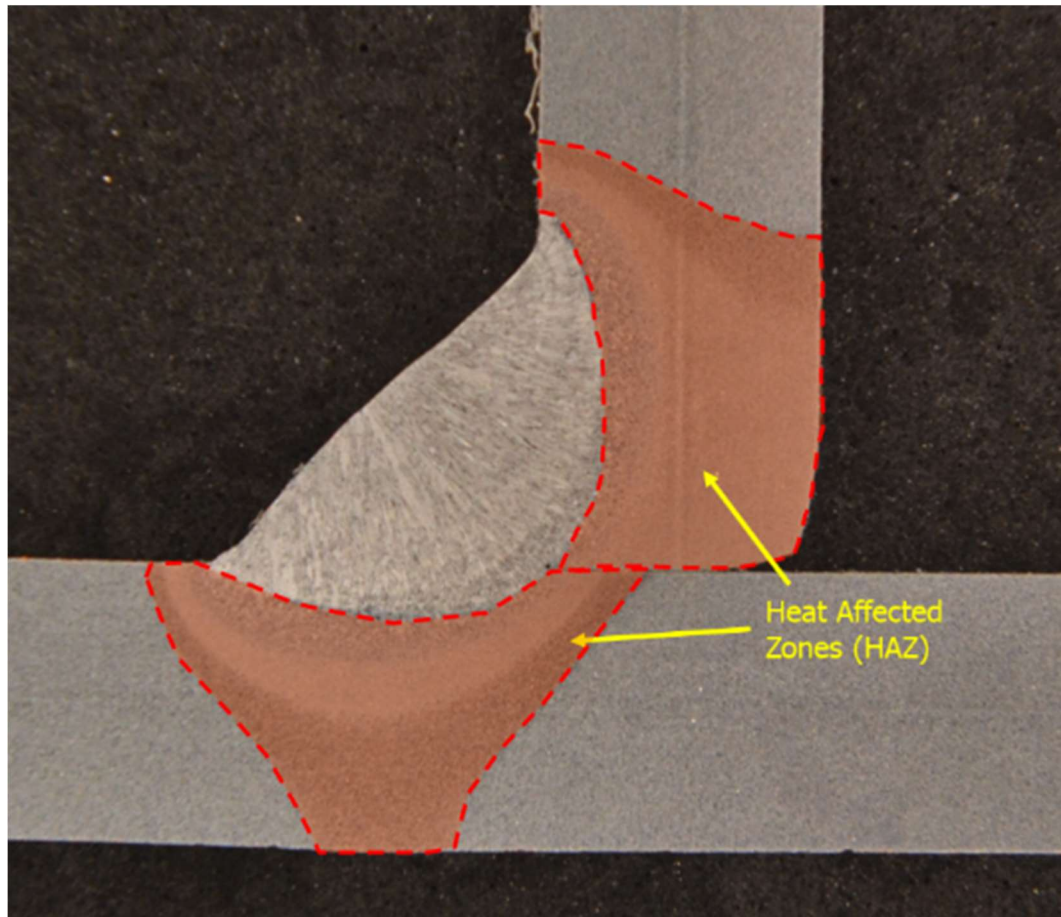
Heat Affected zones of a fillet weld
